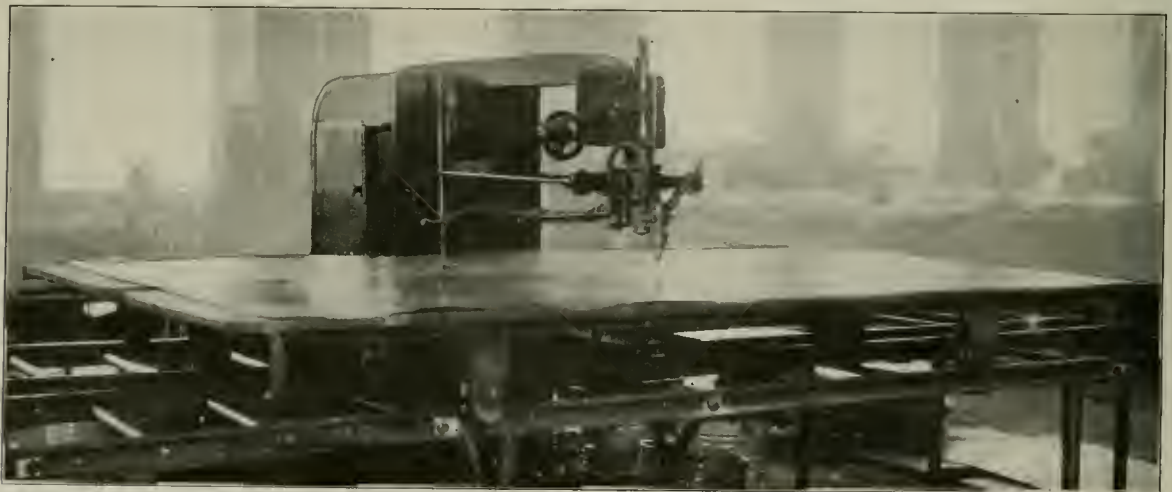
Machine Arranged for Spot Welding Locomotive Jackets
